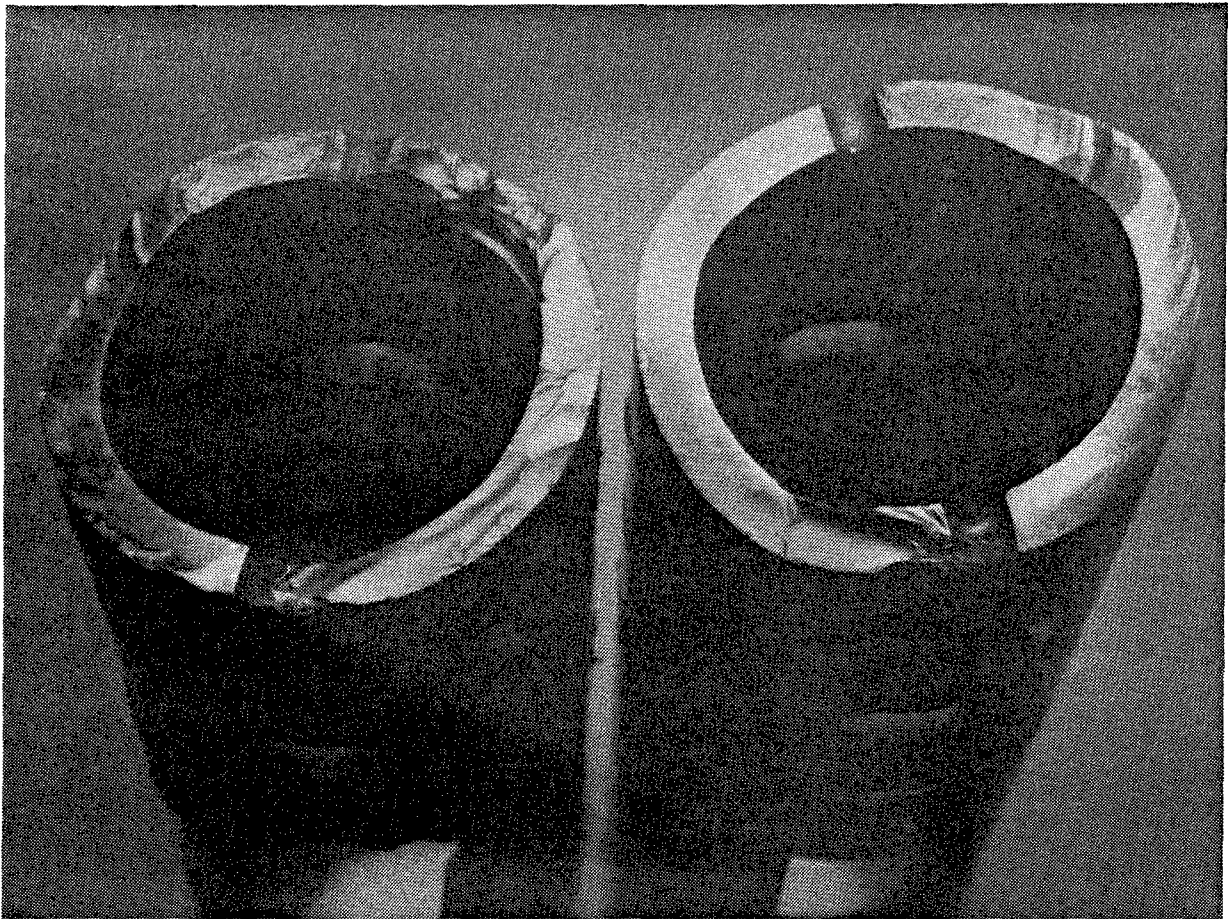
SASC Cylinder - Bending Failure (B/N-05)
